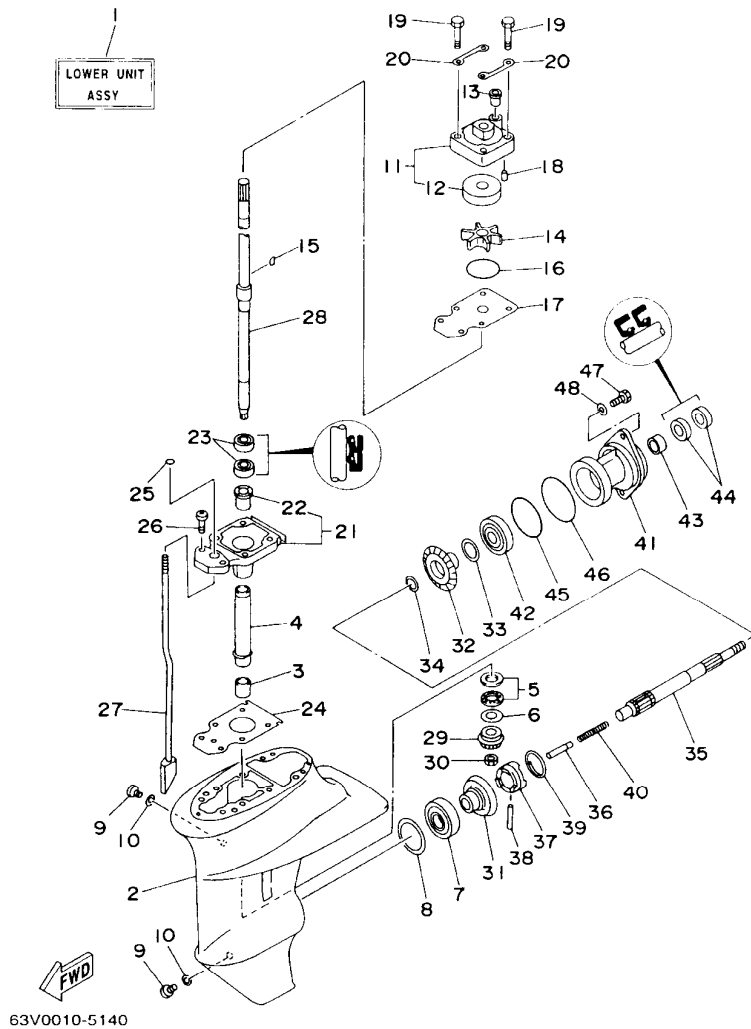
LOWER CASING. DRIVE 1 IMPULSOR E INFERIOR 1
